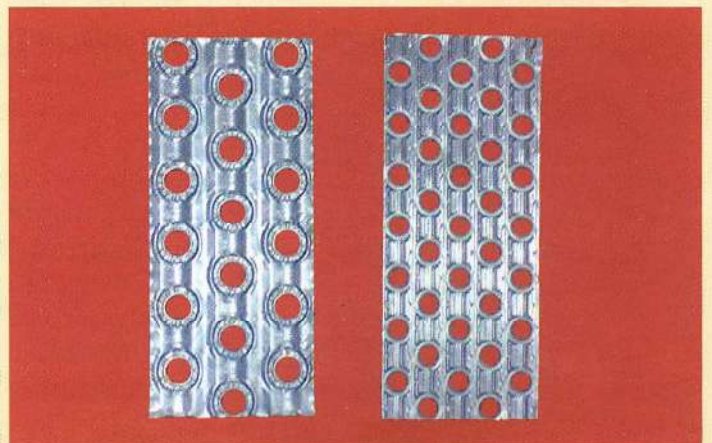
Fin pattern with 18x3/8 tubes and 37x5/16 tubes.
